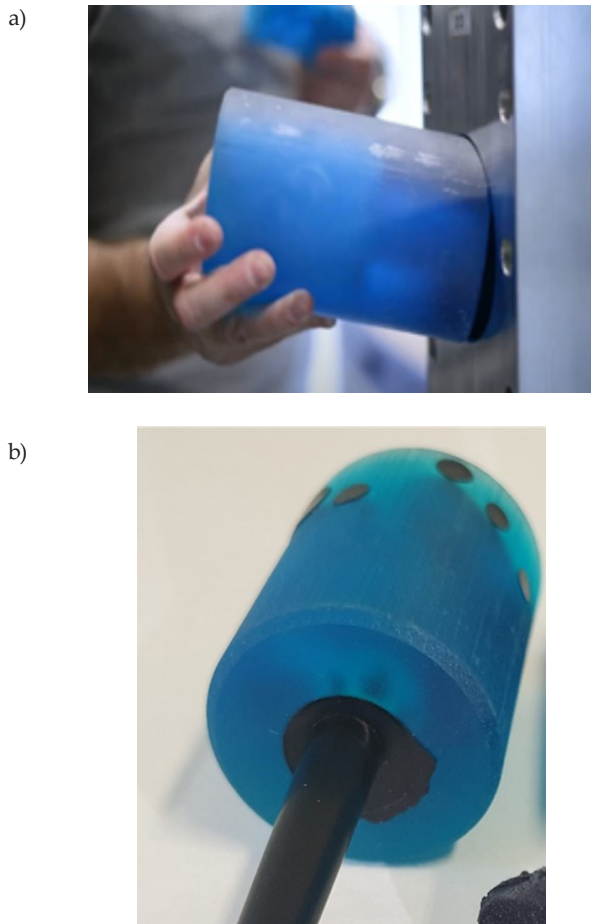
View of the xMold resin socket attached to the metal mold before injection (a) and after a full PEEK injection cycle (b)
